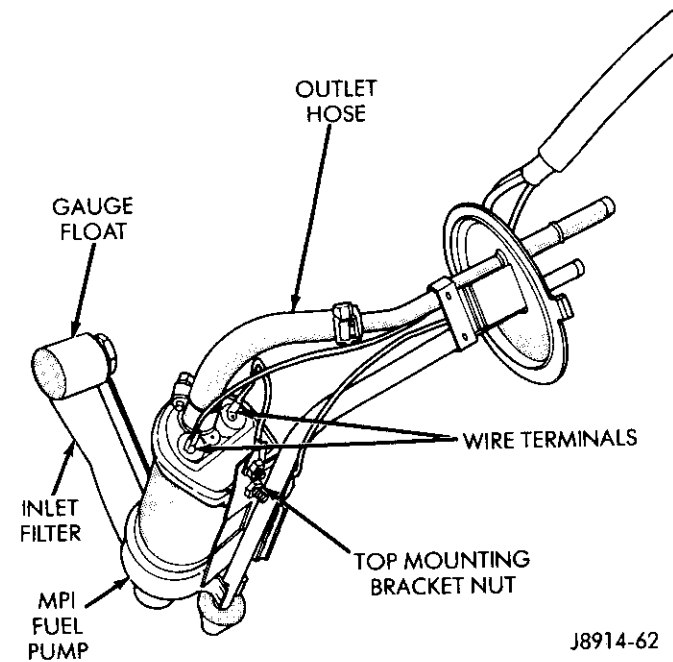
MPI Fuel Pump/Gauge Sender Unit Disassemble/Assemble
